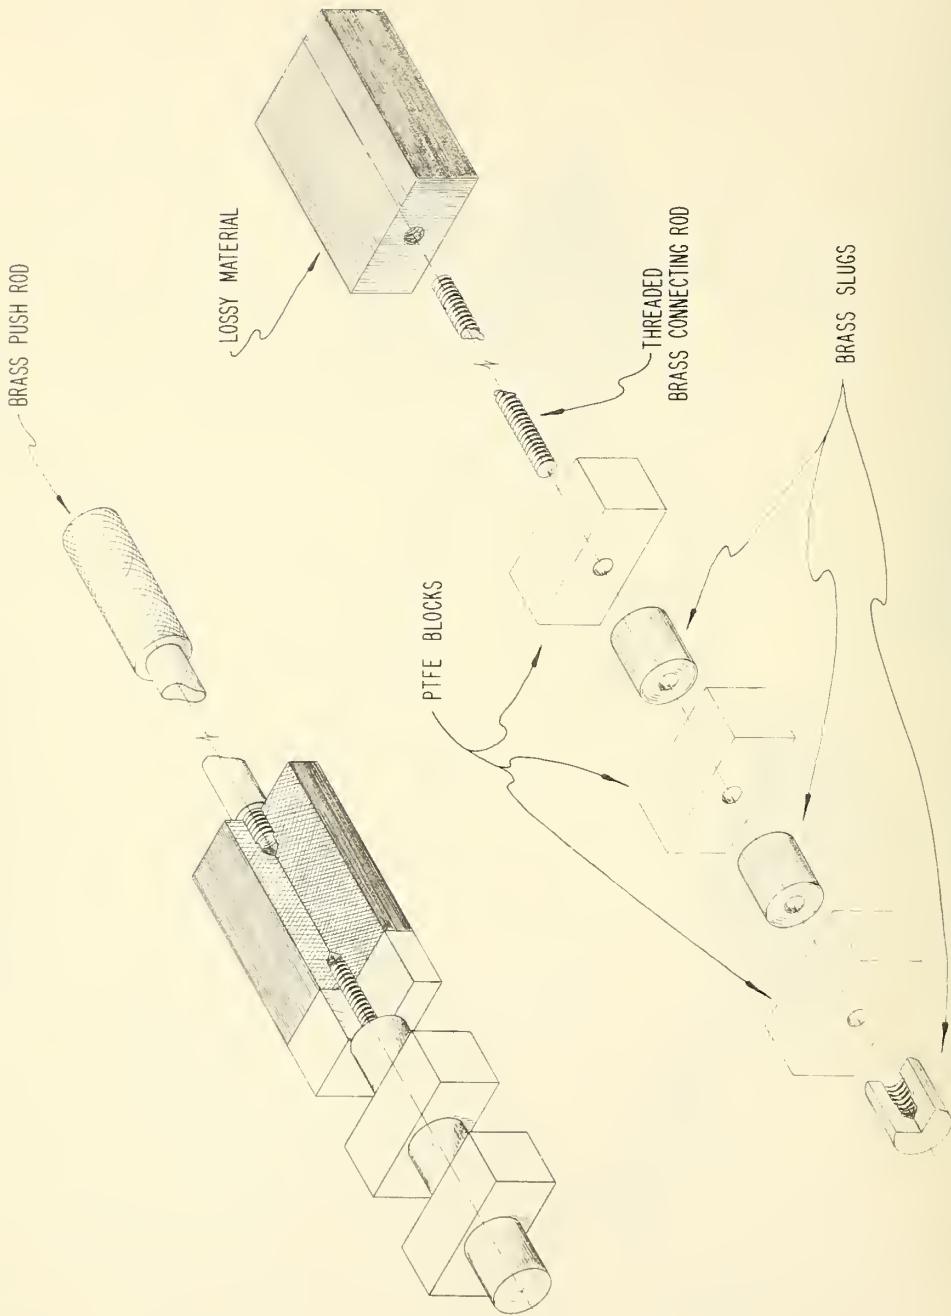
Assembled and exploded views of a sliding slug with a three-section cylindrical brass slug and rectangular PTFE spacer blocks.
